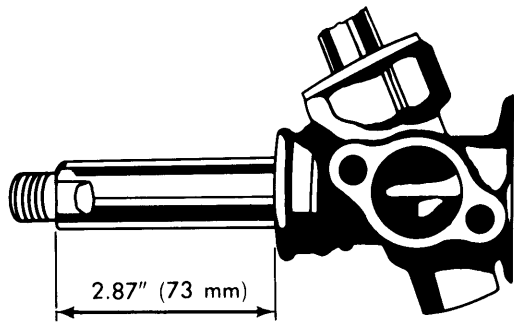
View Showing Method of Centering Rack in Gear Housing
